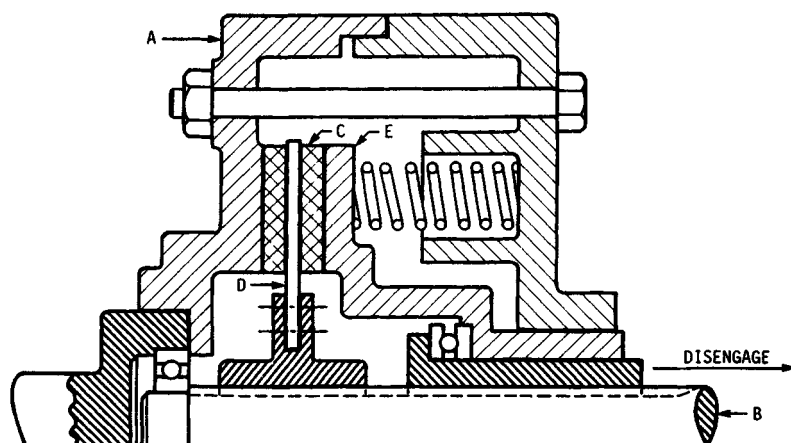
Schematic drawing of an axial clutch; *A*, driving member; *B*, driven shaft; *C*, friction plates; *D*, driven plate; *E*, pressure plate.
